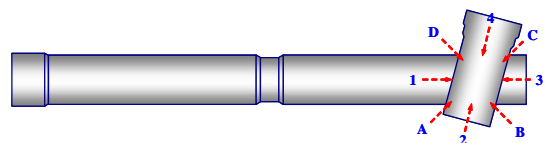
Measured position of weldment by CMT and laser heat source
